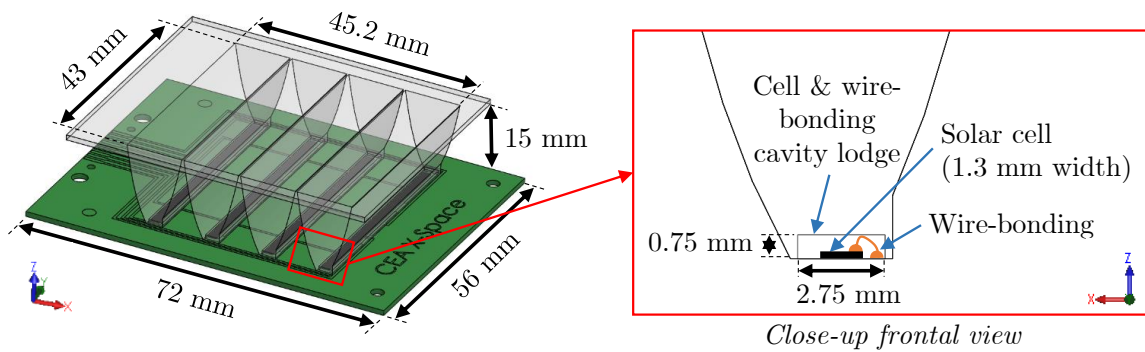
Schematic of baseline prototype module illustrating some dimensions (left), close-up front view of the lower part of a single optic, showing the cavity lodging cell and wire-bonding.
